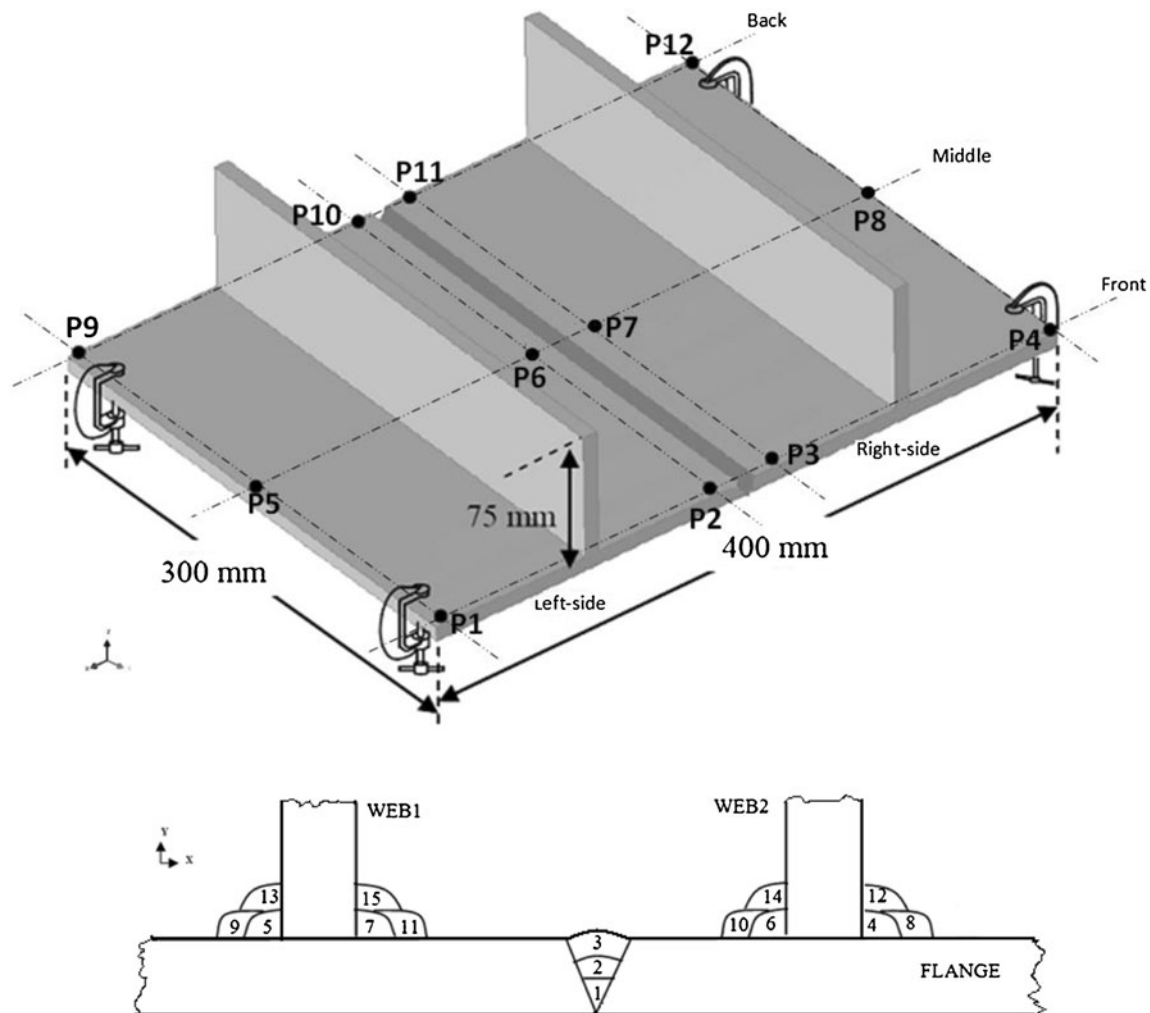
Combined butt and T-joint geometry and welding sequences
